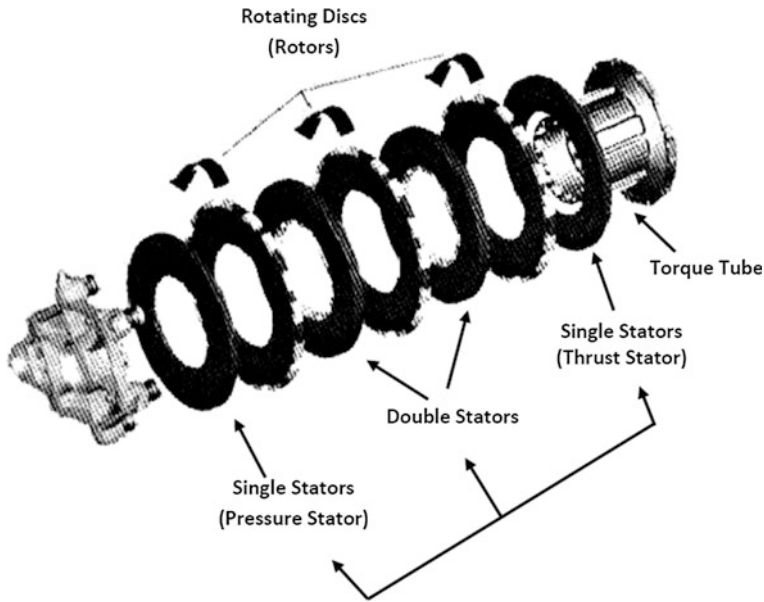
Exploded view of C-C composite brake discs stack in *TEJAS* aircraft wheels
